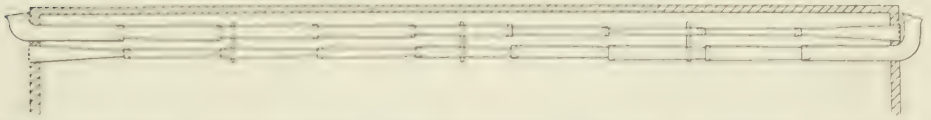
SECTIONAL PLAN, SHOWING APPLICATION OF A SERIES OF CONES TO THE VENTILATION OF A STREET CAR
